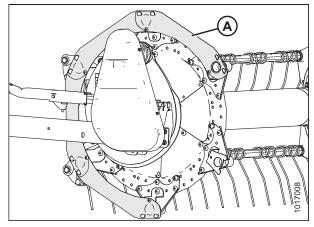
Reel Endshield – Cam End Shown, Tail End Similar
